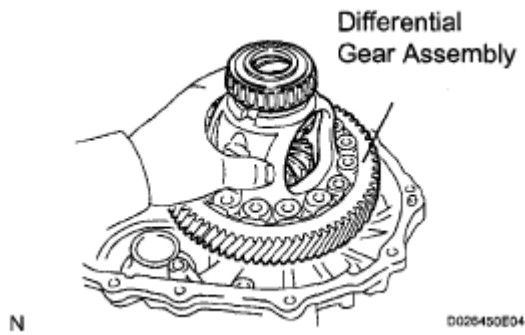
Removing Differential Gear Assembly From Transaxle Case
